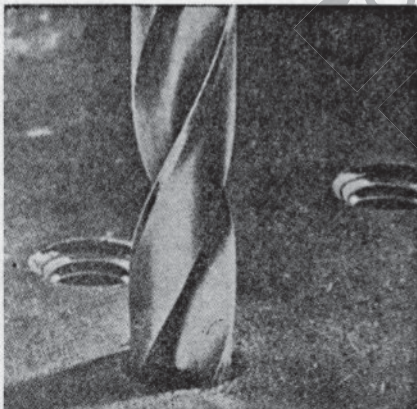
First step in repairing damaged threads is to drill out old threads using exact size drill recommended in instructions provided with thread repair kit. Drill all the way through an open hole or all the way to bottom of blind hole, making sure hole is straight and that centerline of hole is not moved in drilling process. (Series of photos provided by Heli-Coil Corp., Danbury, Conn.)
